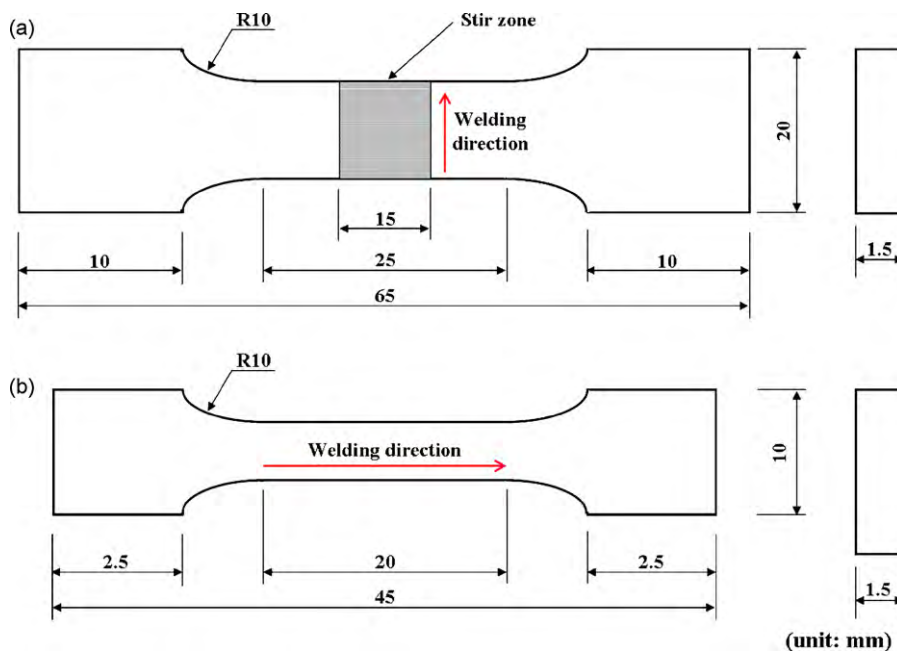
Configuration of (a) transverse (weld joint) and (b) longitudinal (stir zone) tensile specimens used in this study.
